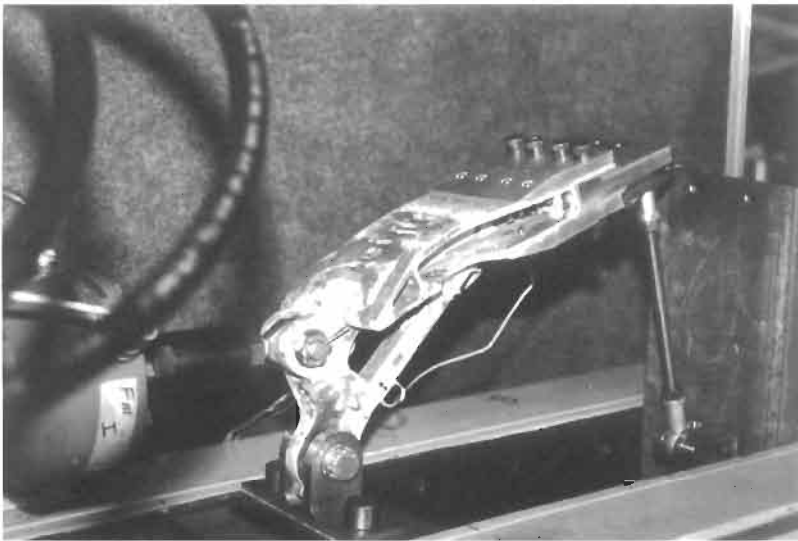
Close up photograph of test article in WO42 configuration. Test fixtures can be seen at the end of the hinge.
